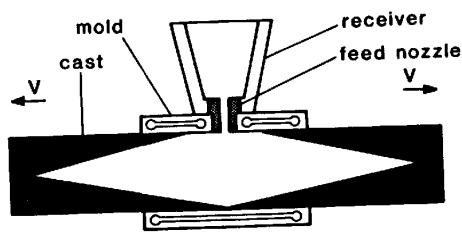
Schematic drawing of USSR type machine³⁸⁾.
